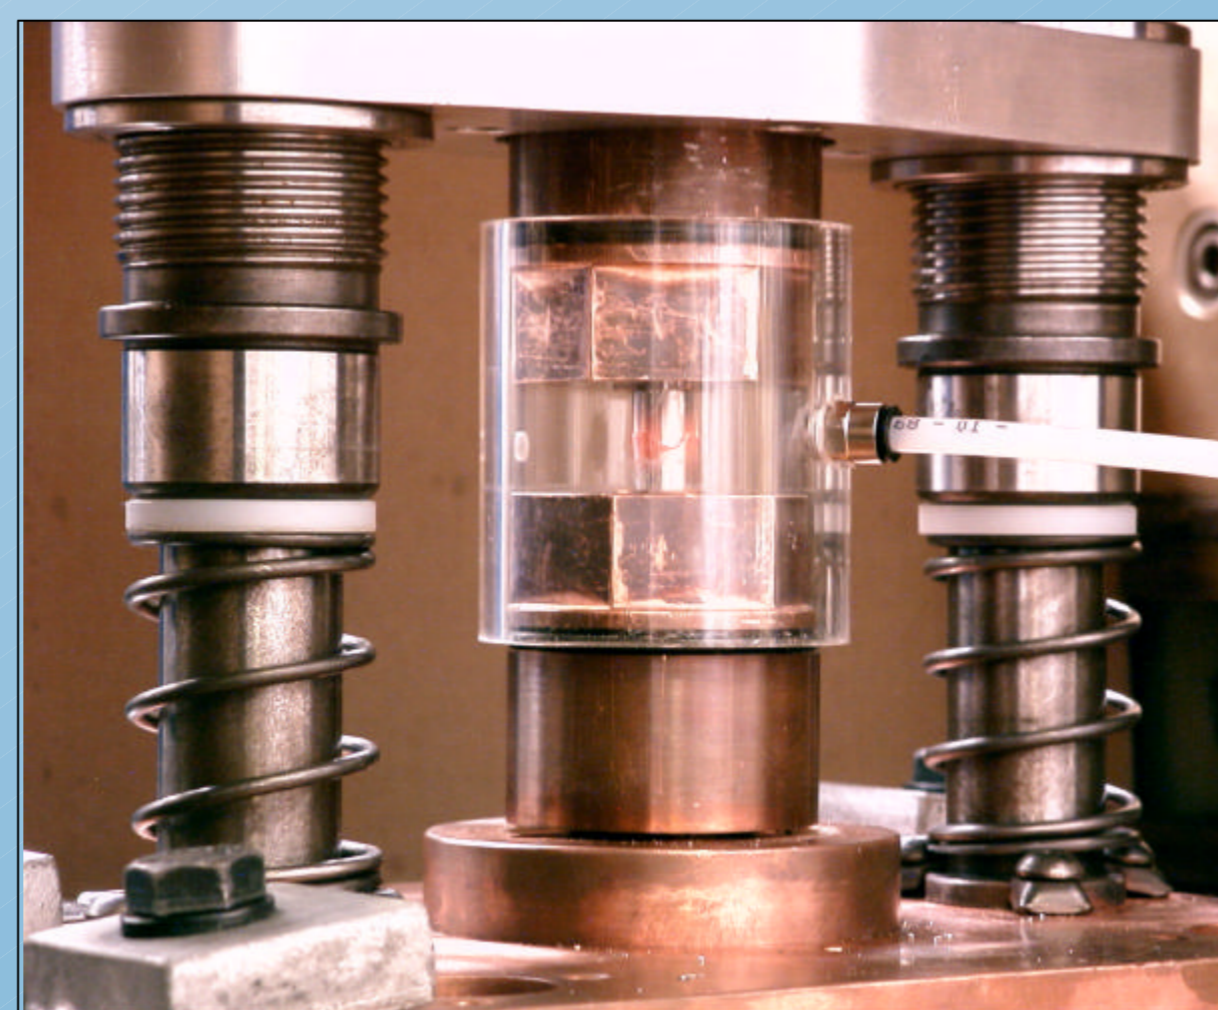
Special welding tool system with lining guides and protective gas usage during the electrical discharge.
